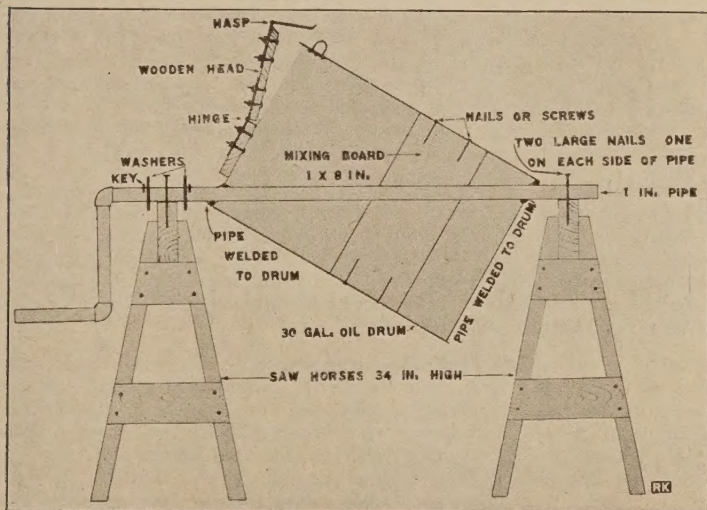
Working drawing of oil drum mixer for treating seeds with dust disinfectant. (After R. S. Kirby, Cornell University Extension Bulletin 157.)
